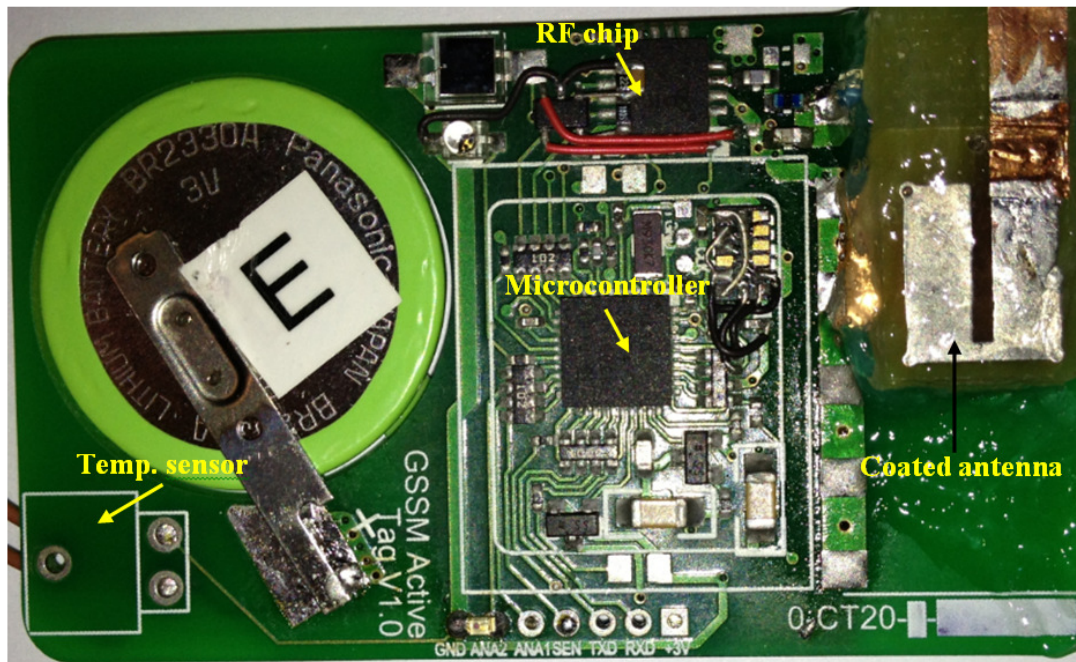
Attachment of coated antenna (3rd prototype) to the RFID tag PCB
